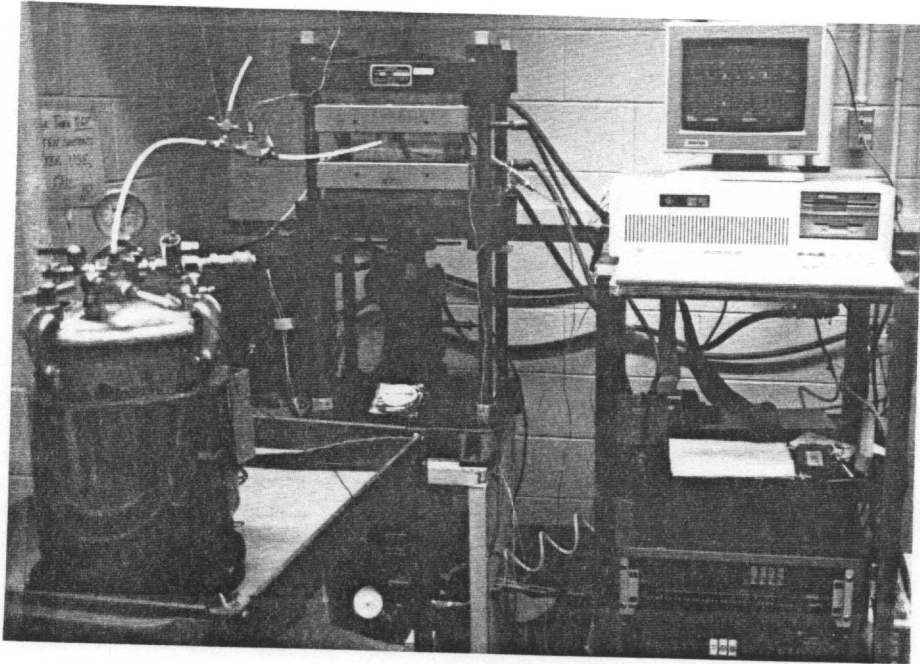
Photograph of the setup for composite manufacture by the Pressure-Injection Resin Transfer Molding technique.
